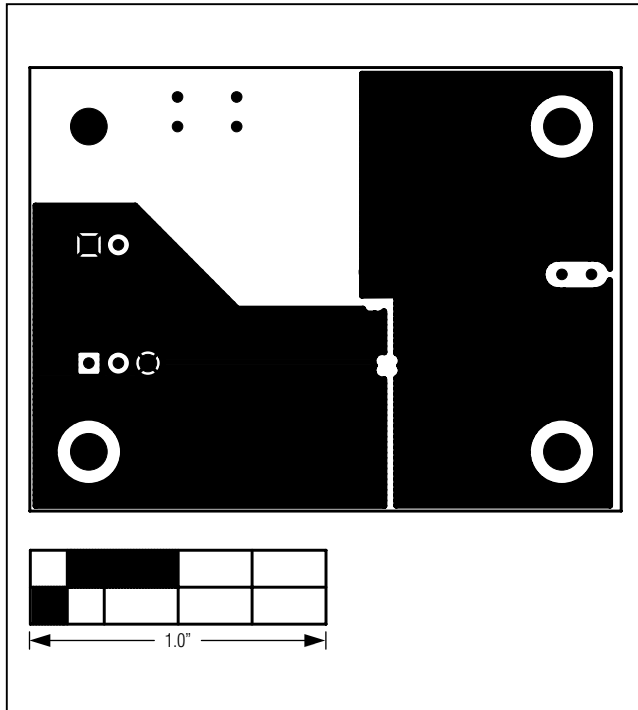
MAX8989 EV Kit PCB Layout—Inner Layer 3
